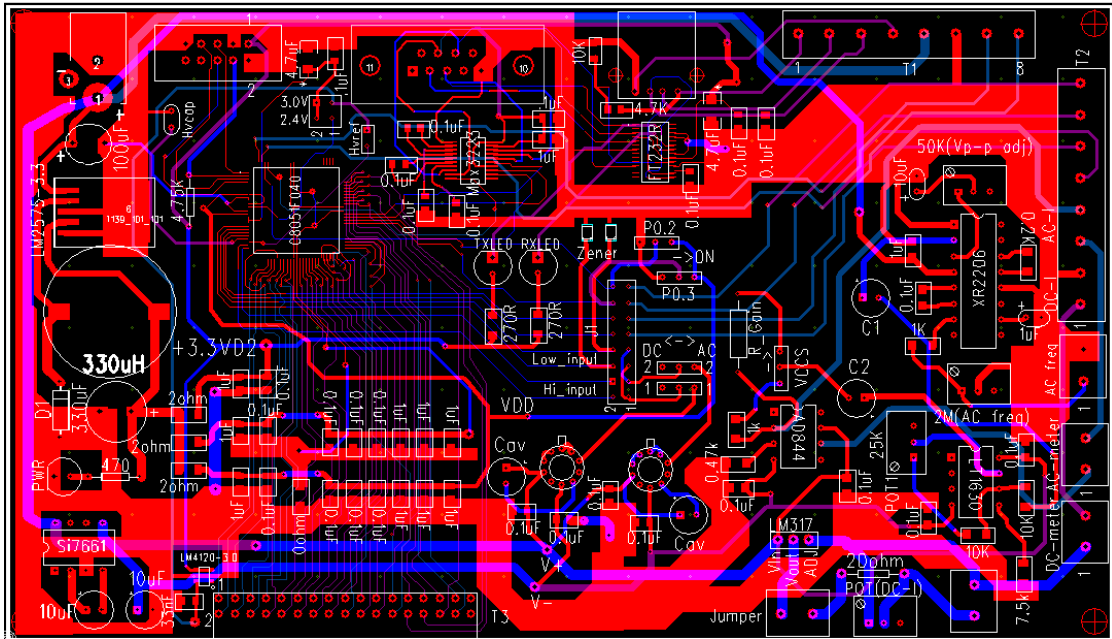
NERAC's PCB layout using PCB123™ software tool to design.
